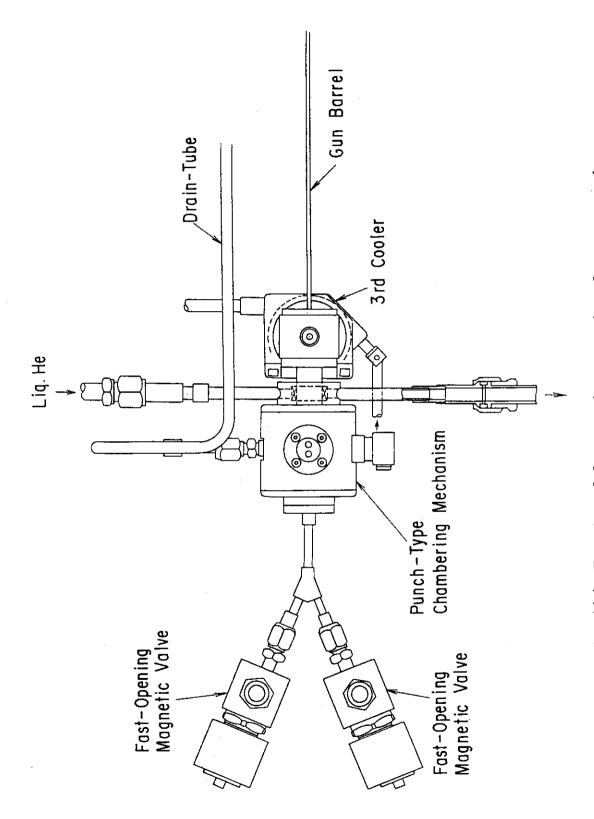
(a) Top view of fast-opening magnetic valves connected to the punch-type chambering mechanism.
